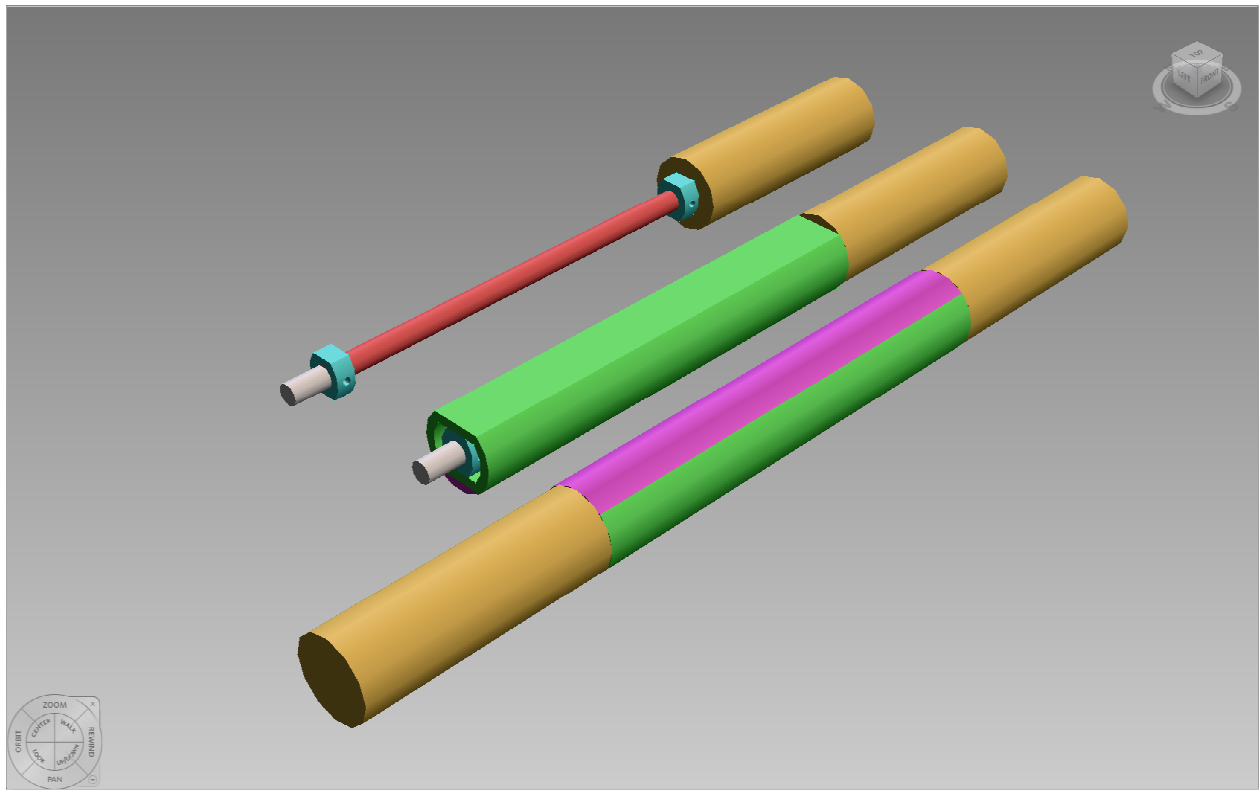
Prototype 3.0 Concept Design (CAD Drawing by David Magnano)
